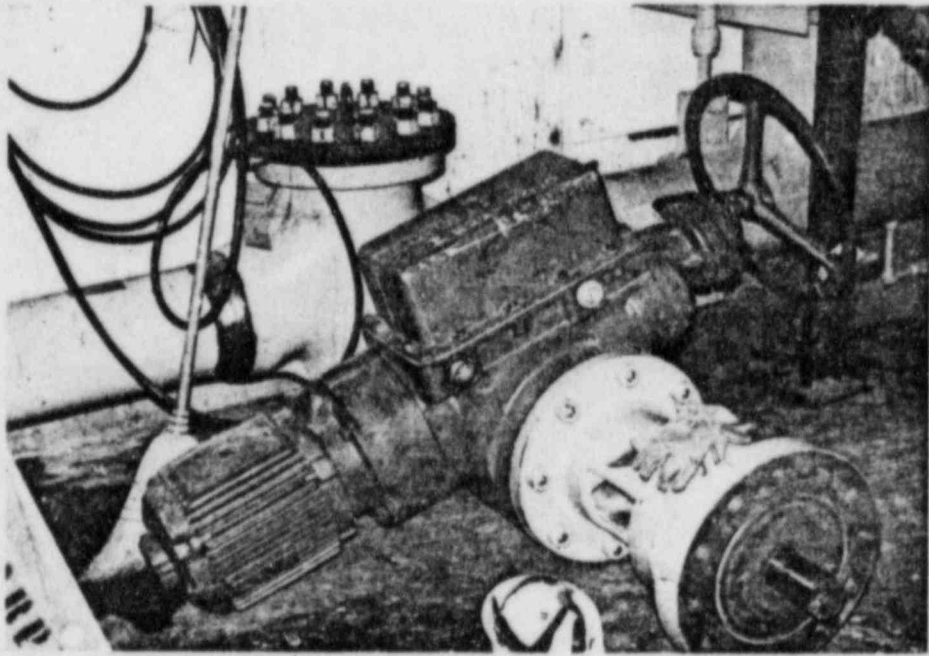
FO10 VALVE DISASSEMBLED. BODY IS BLANKED OFF WITH A COVER PLATE
